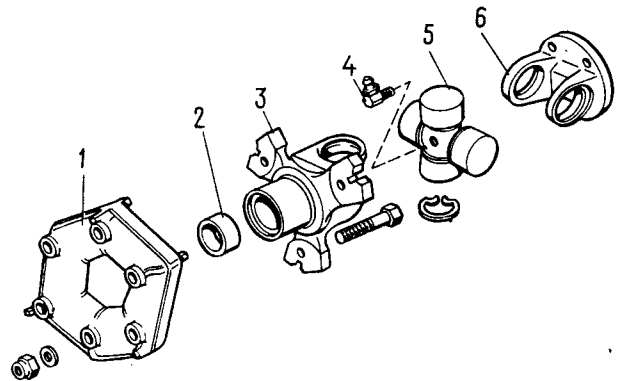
Parts of Intermediate Propeller Shaft:
